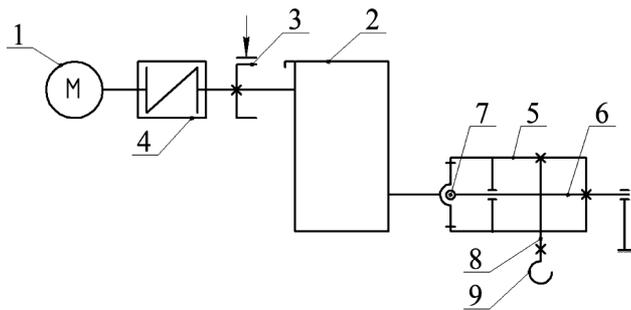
Kinematic scheme of an overhead crane lifting gear: 1 – electric motor; 2 – gear box; 3 – electromagnet block brake; 4 – flexible bolt coupling (with brake pulley); 5 – drum; 6 – drum axle (or shaft); 7 drum support; 8 – load cable; 9 – hook assembly
